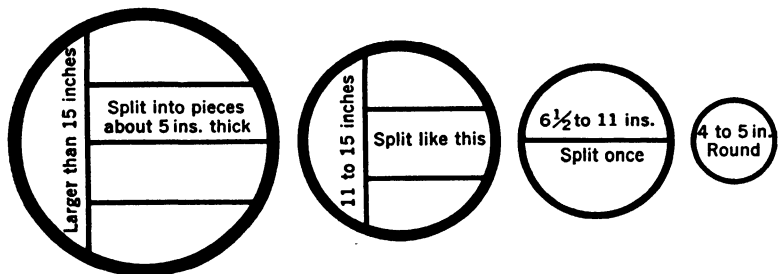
Method of splitting various size bolts for use in excelsior machines.
